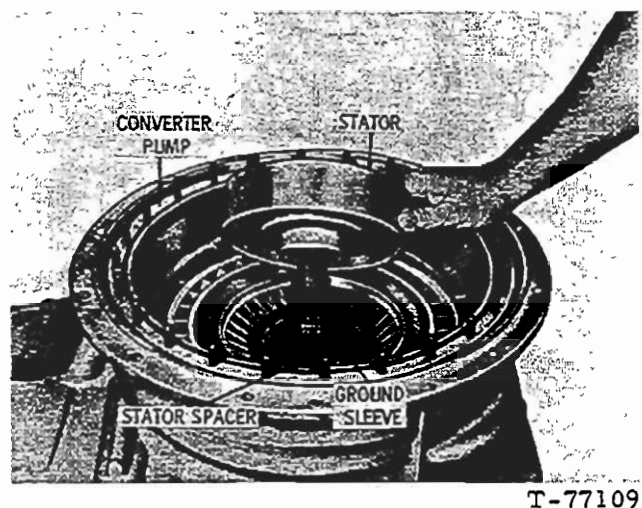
INSTALLING TORQUE CONVERTER STATOR
